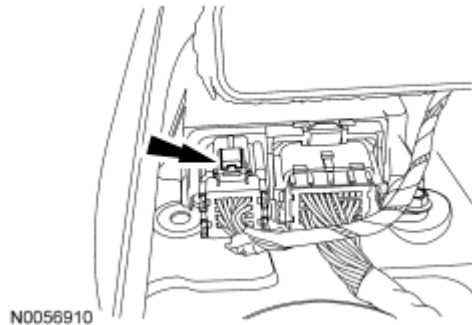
Locating Locking Tab On Small RCM Electrical Connector
